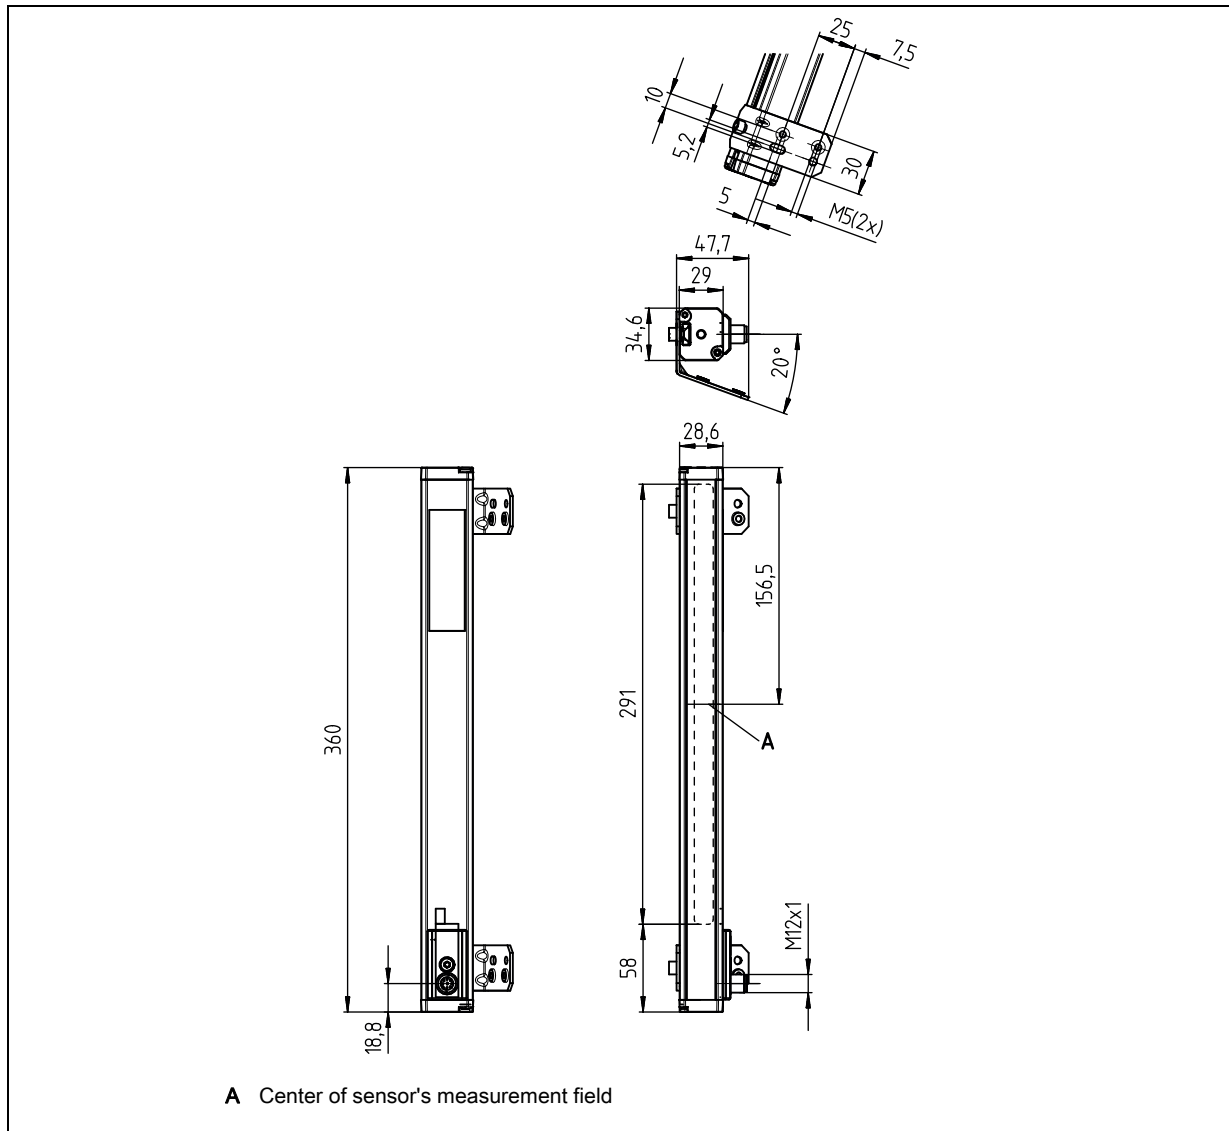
Dimensioned drawing OGS 600-280/D...-M12.8 – long version
